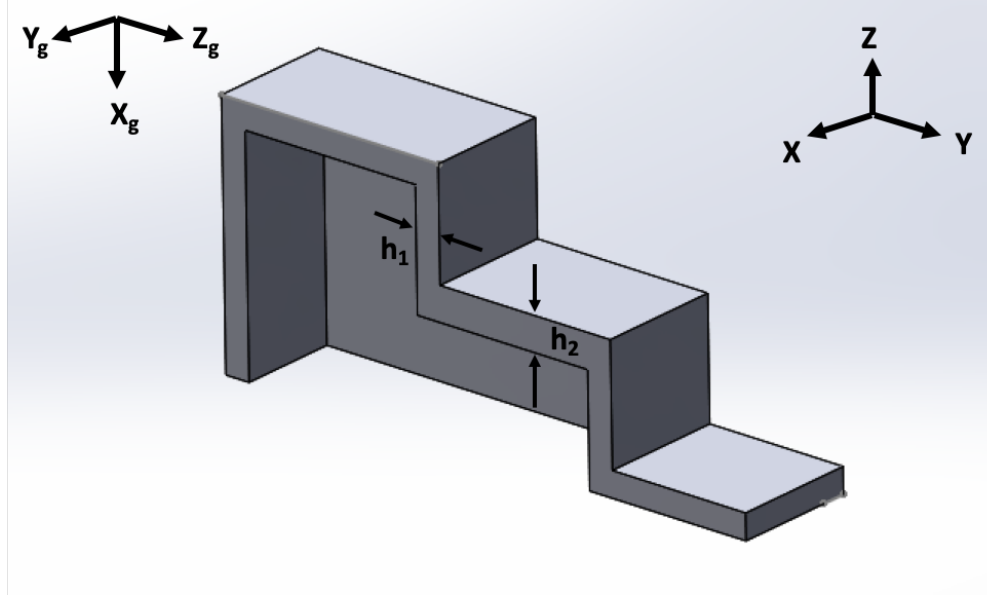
Cross-sectional view of the flexible gripper showing key design dimensions h_1 and h_2 .
